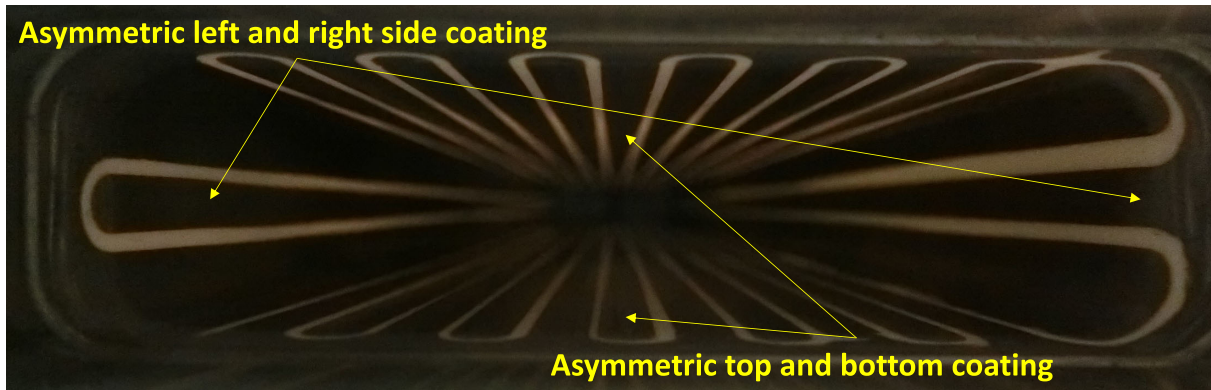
Comb-tooth-patterned coating for the PSM2 ceramic chamber using FLiP technology.
